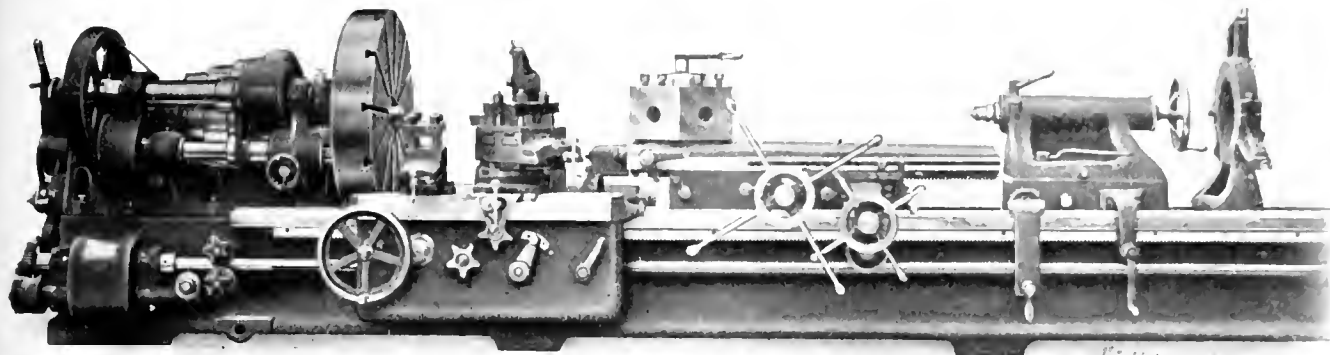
Front View of Heavy "American" Lathe, with Turret mounted on Independent Slide on Shears.
